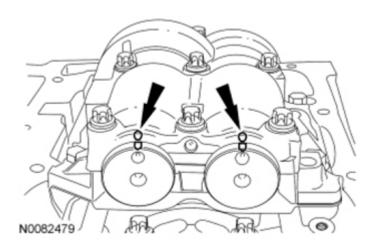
Locating Balancer Unit Bolts Courtesy of FORD MOTOR CO.
